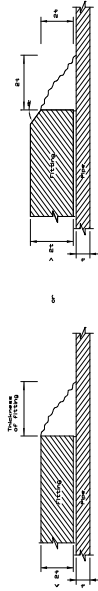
Dimension of fillet leg length to suit thickness of fitting
